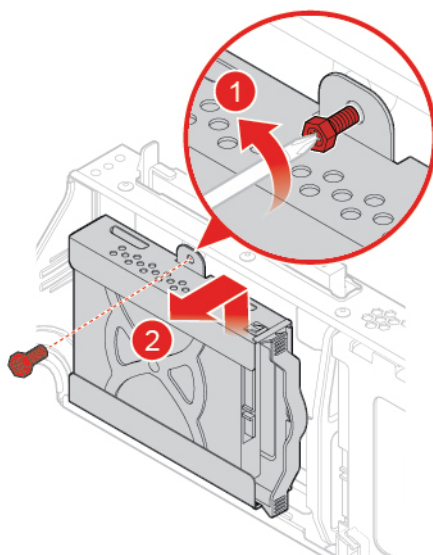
Removing the outer 2.5-inch secondary storage drive bracket
